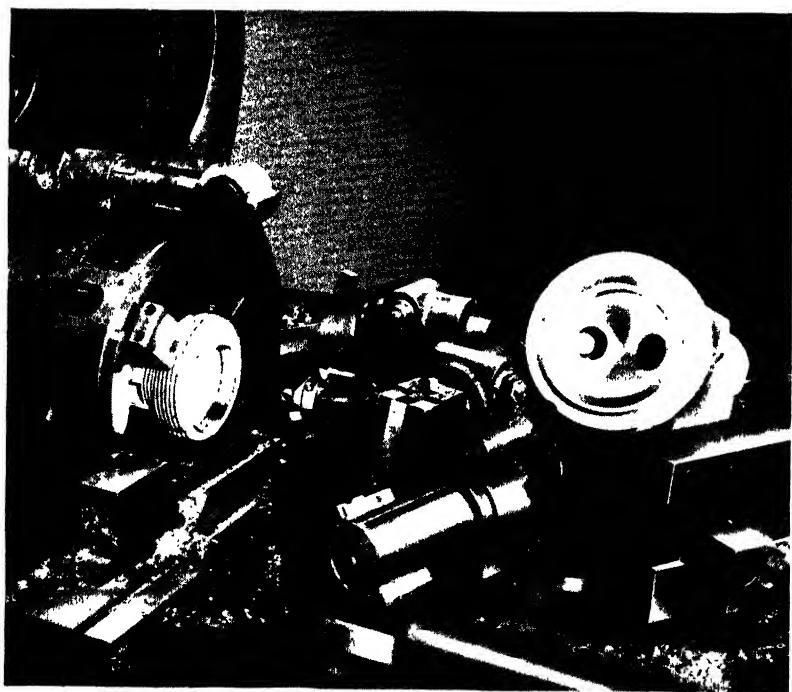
Automatic Used for Machining the Combustion Chamber and Other Surfaces on Cylinder-head Castings
